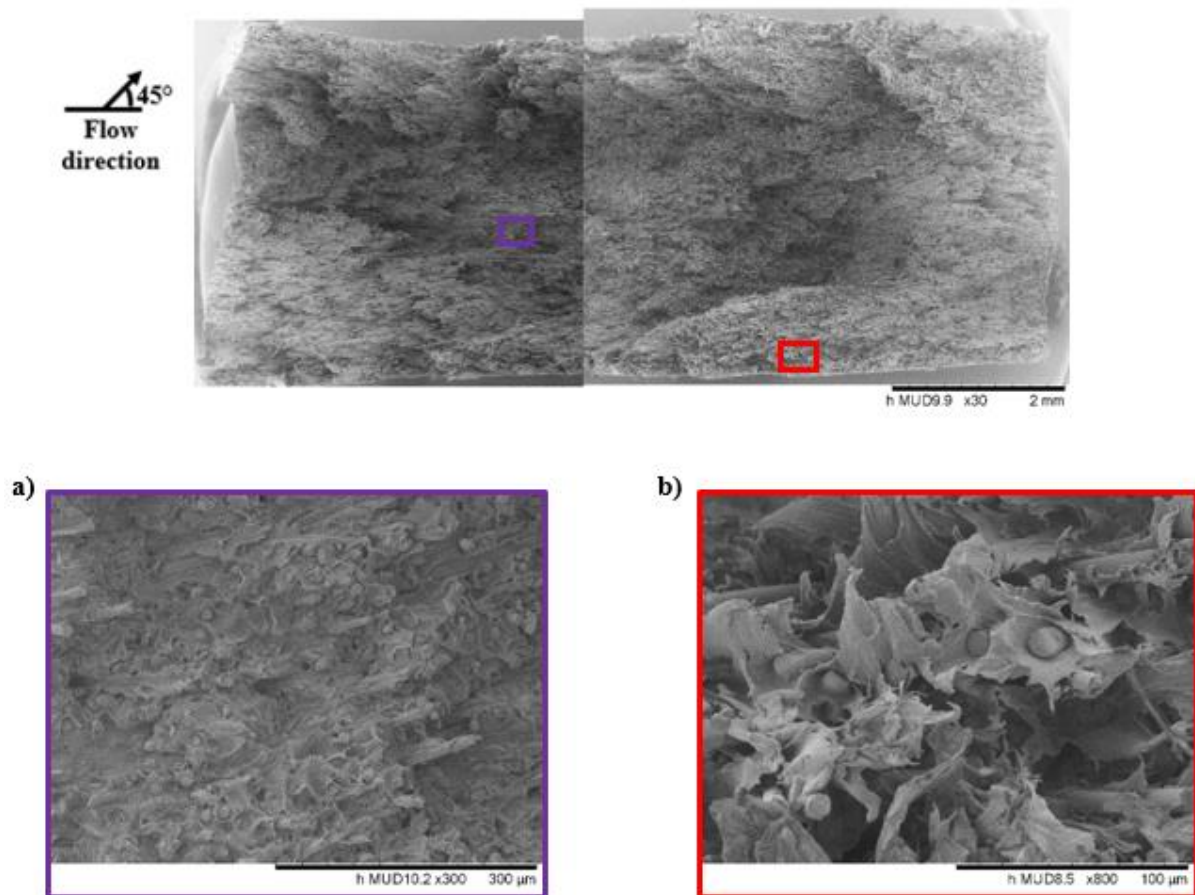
Fracture surface of a fatigue 45° specimen at 50° C
